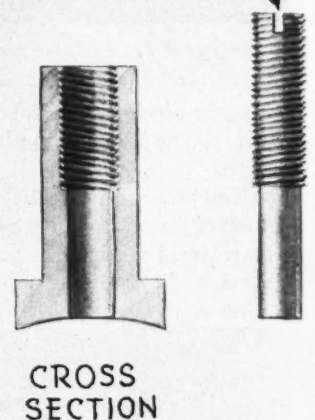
Tube which acts both as sprue former and injection chamber. Threaded driver is the injector and compressor.
